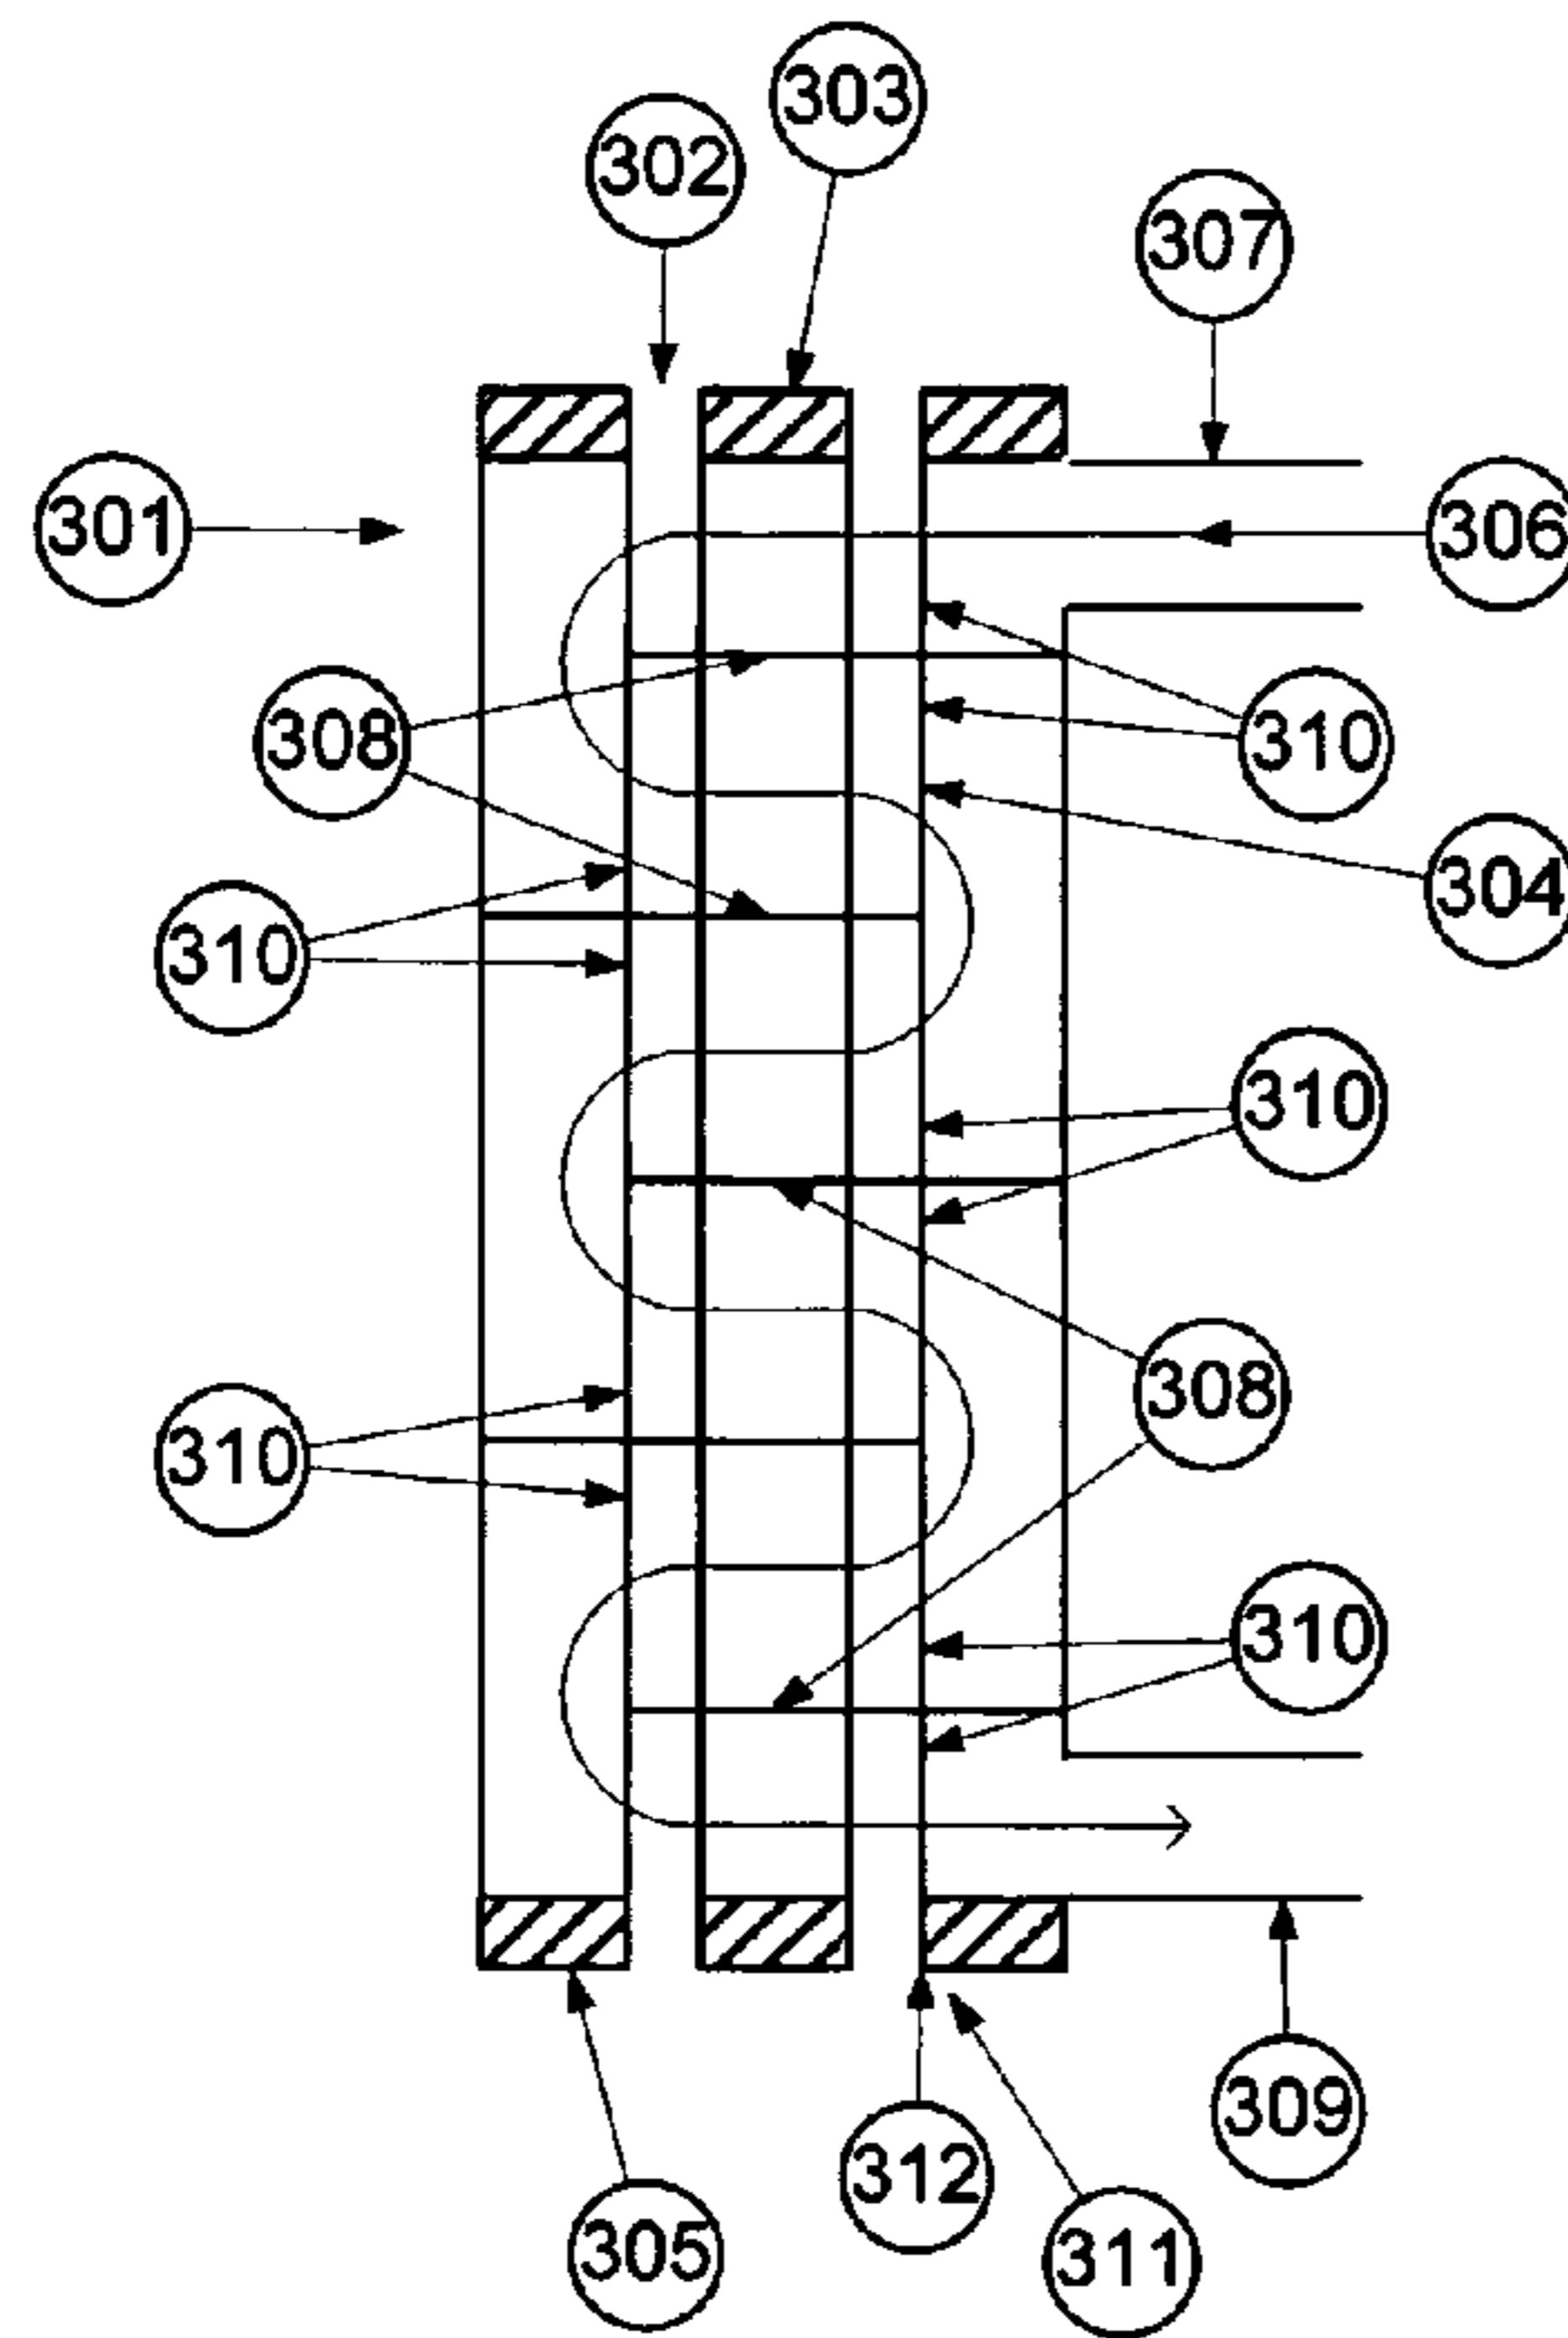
Schematic cutaway view illustrating the flow path of fluid through a standard shell and tube heat exchanger (Prior Art)
